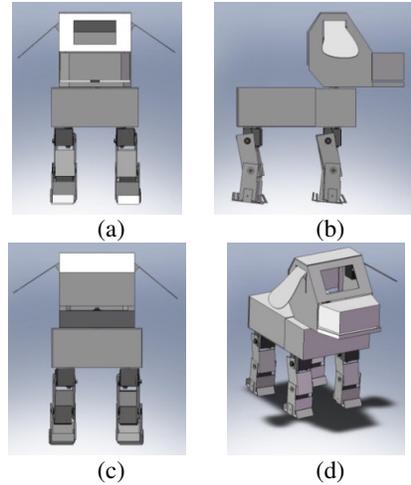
Mechanical design of the pet robot. (a) Front view, (b) Side view, (c) Back view, and (d) Bird view.
